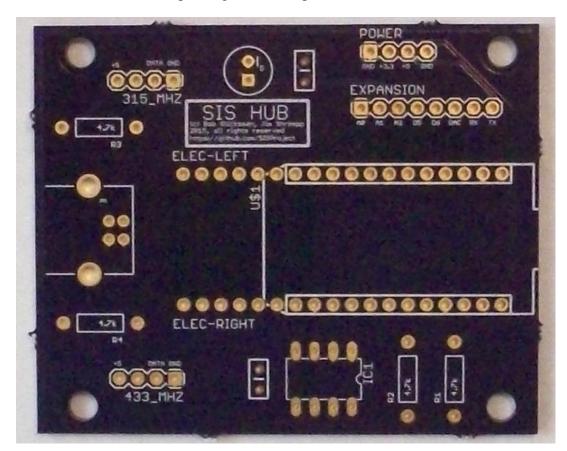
Top Side of Blank SIS Hub PCB. Note that the "front side" is to the right.
